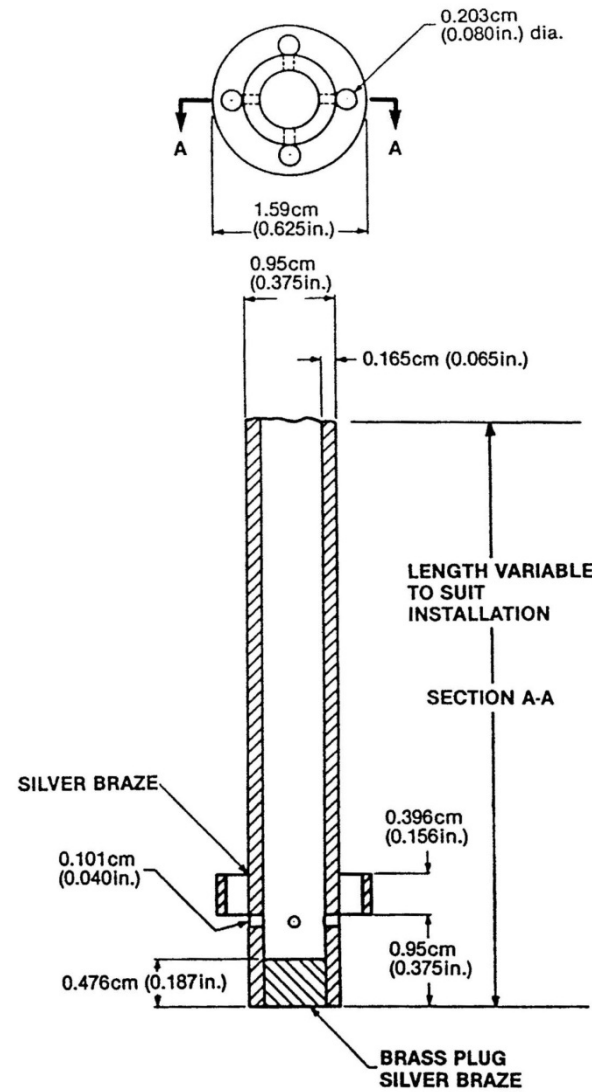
Details of Laskin Nozzle IEST-RP-CC-013-86-T
